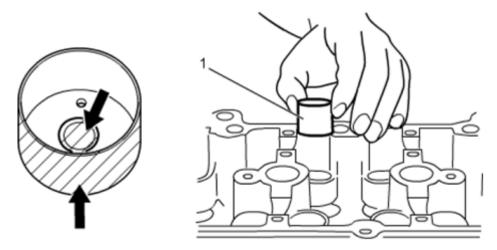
Installing Tappets To Cylinder Head Courtesy of SUZUKI OF AMERICA CORP.
